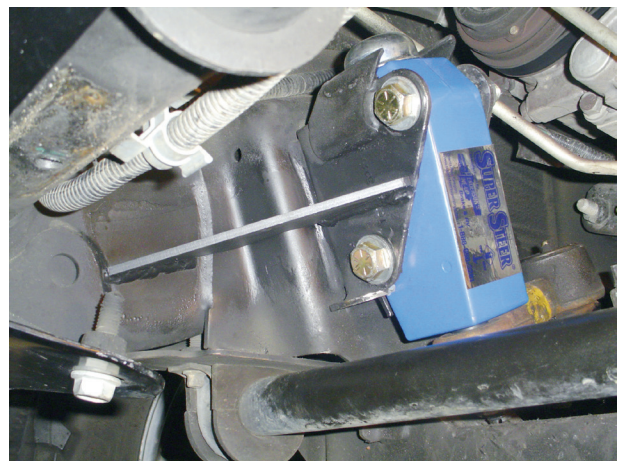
gusset welded to center of brace with SS175 installed
